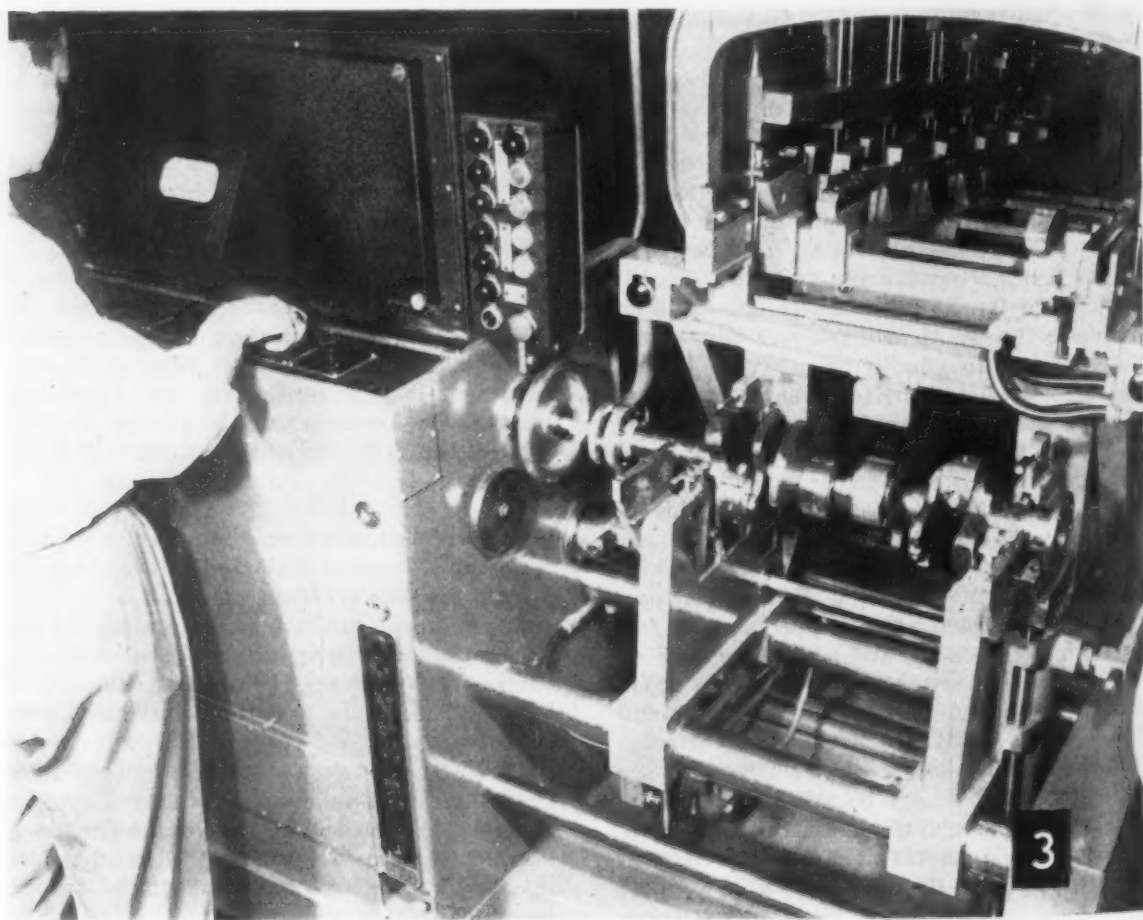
"... a crankshaft is inserted into the unbalance measuring machine and started in rotation."
